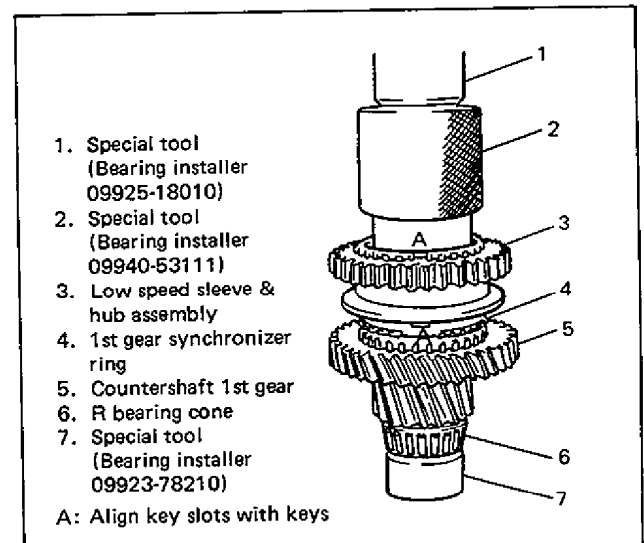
A-66 Press-fitting Low Speed Sleeve & Hub
